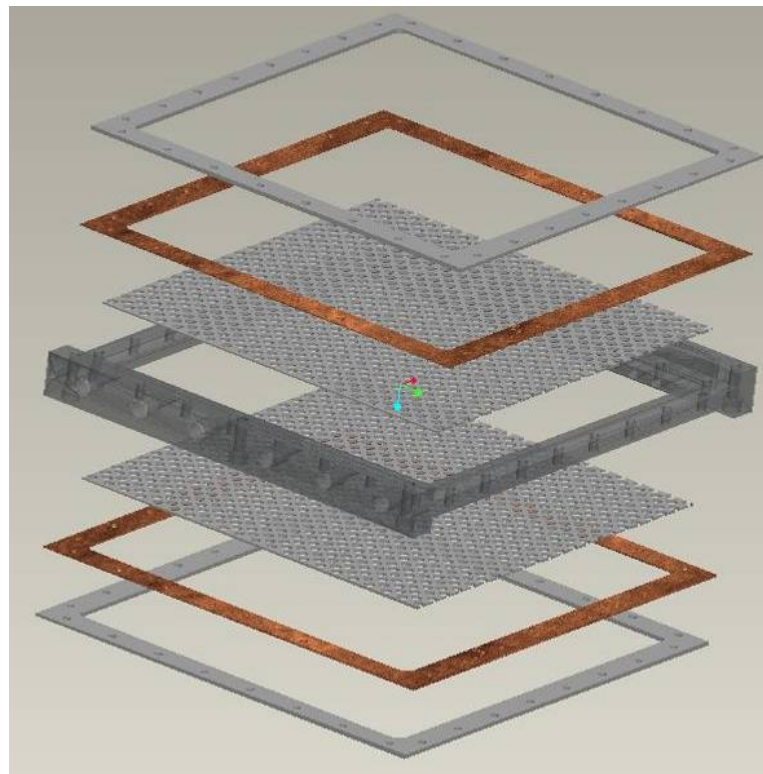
Unassembled STE Plate Module (Pro/Engineer Model)
